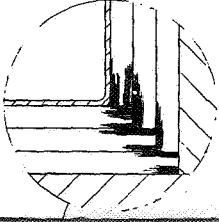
CROSS-SECTION DETAIL OF HEAT SOURCE FUEL PLATE ASSEMBLY
